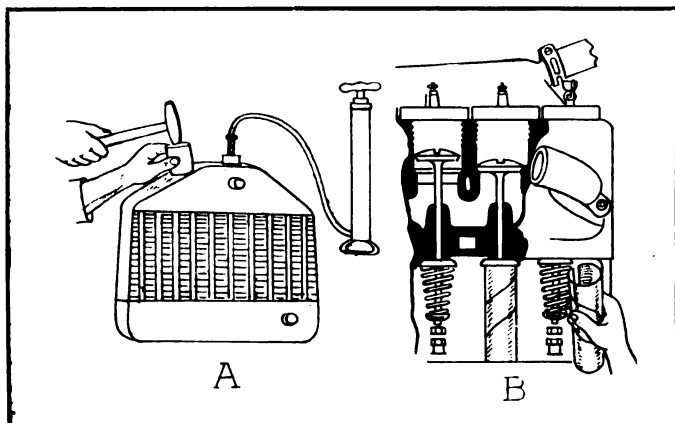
A, Removing Dents from Radiator with Air or Water Pressure; B, Inexpensive Silencing Noisy Valve Stems and Tappets.
